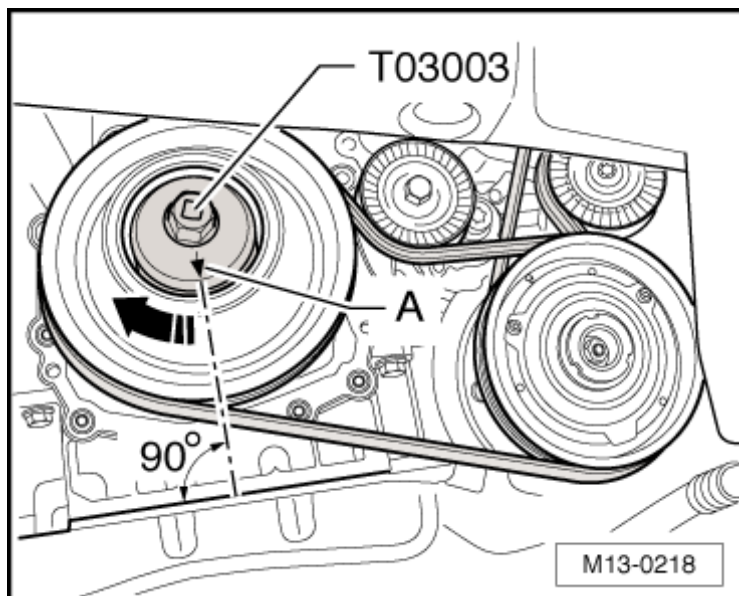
Turning Crankshaft Only In Direction Of Engine Rotation
